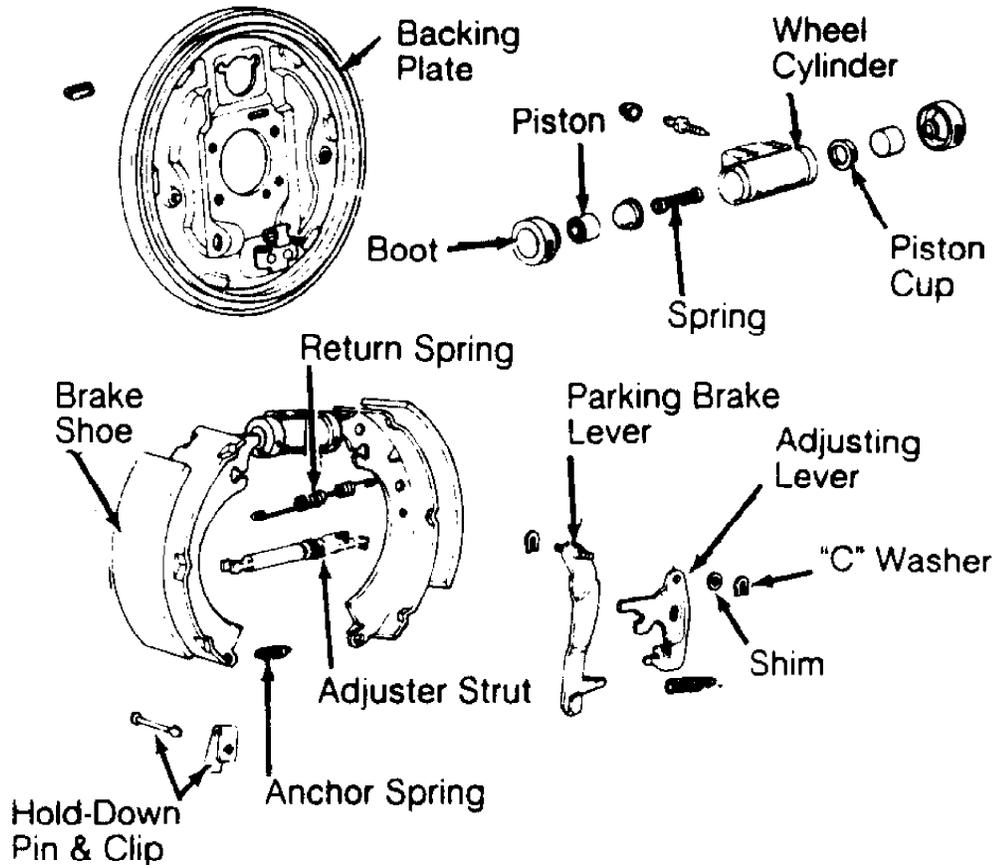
Exploded View of Typical Duo-Servo Rear Drum Brake
